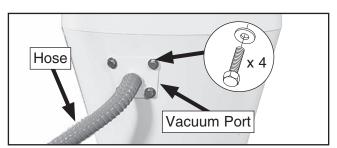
Securing intake barrel assembly to blower housing assembly.
